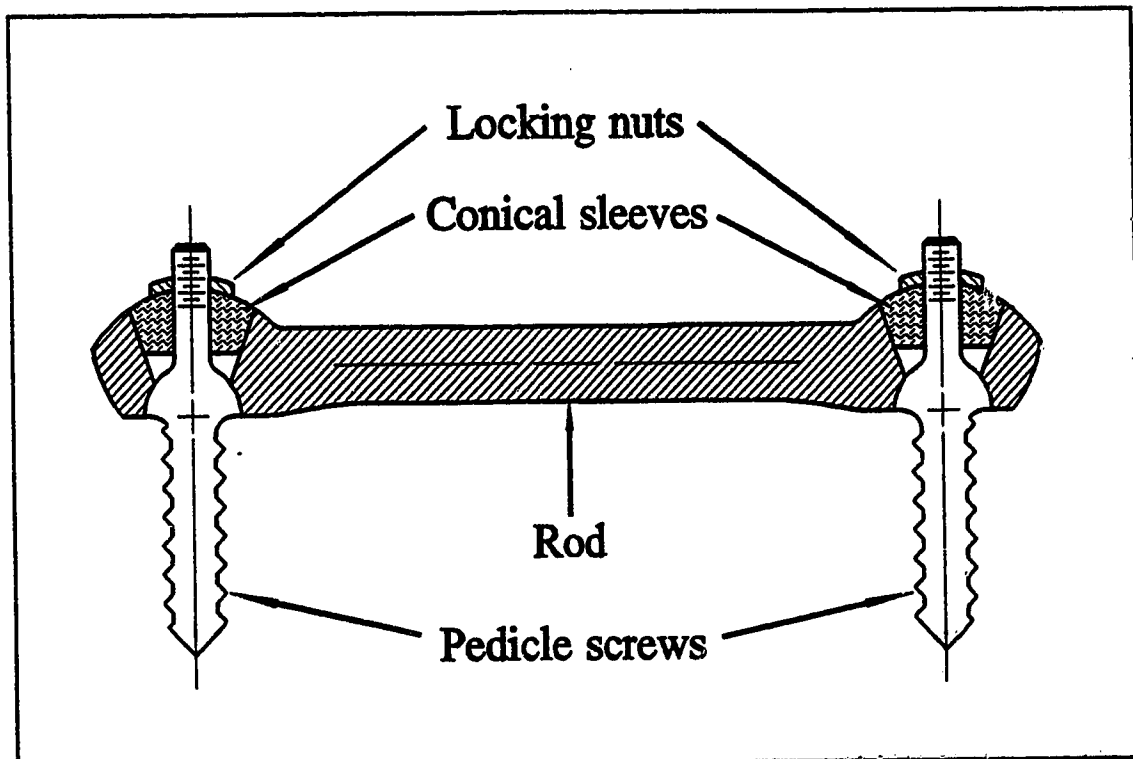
Cross-sectional view of the prototype fracture fixation device (not to scale).
